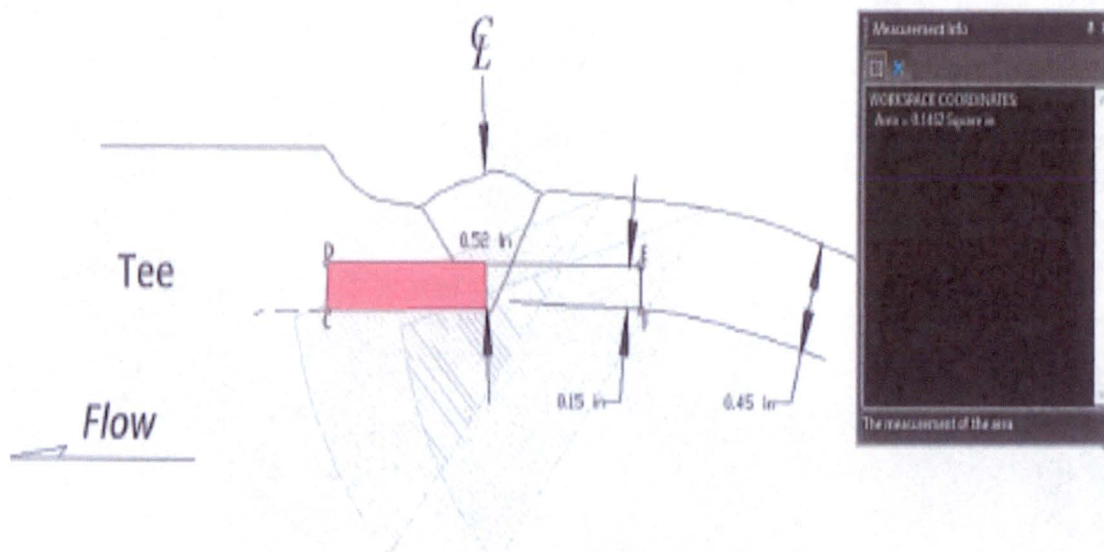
Weld 1-SI-51-22F (Extracted from Reference DRAWING A-59)
